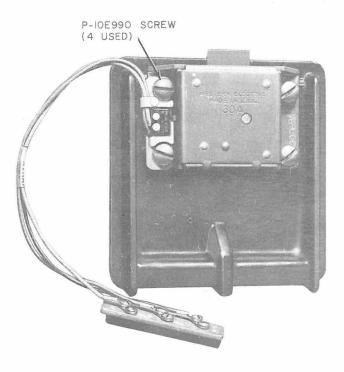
257A Alarm Switch Assembly Mounted on 30-Type Lock
